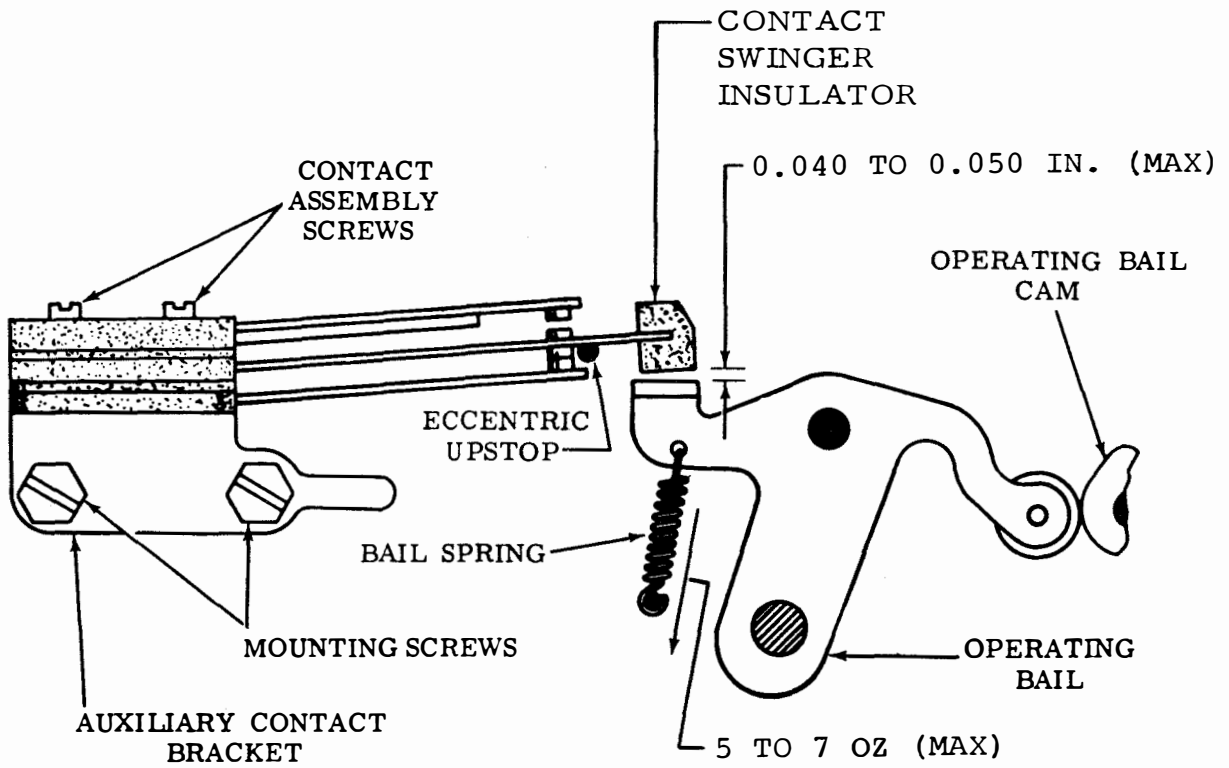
Contact Sensing Arm and Auxiliary Contact Operating Bail Spring, Front View
